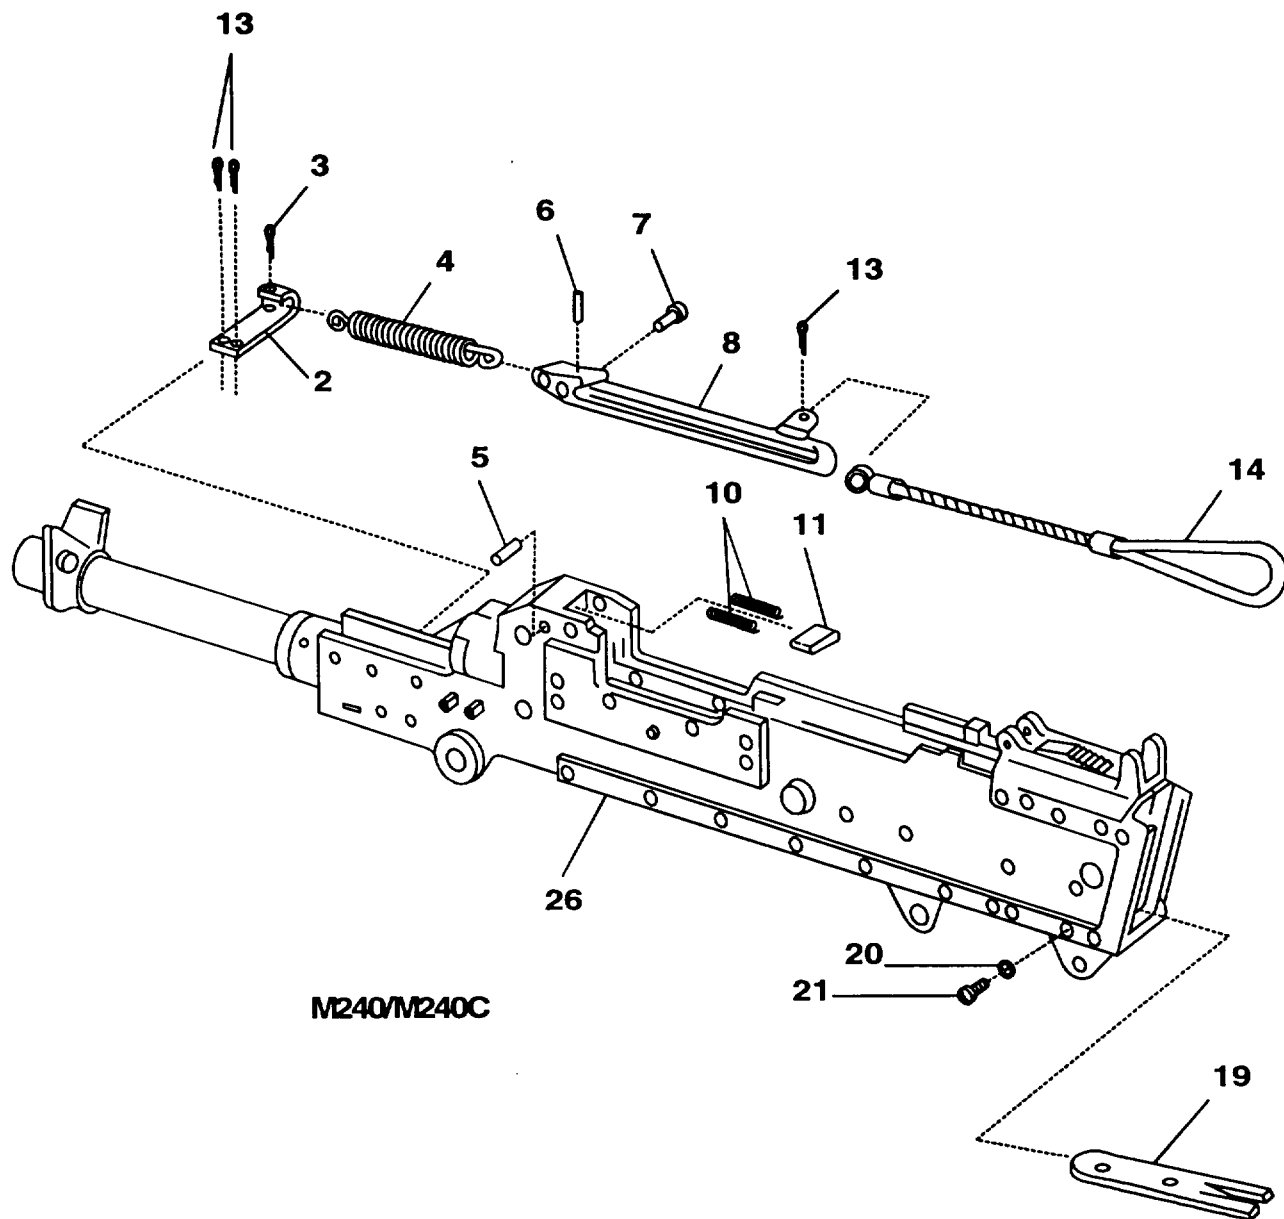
Receiver Assembly, M240/M240C, PN 11826192;
